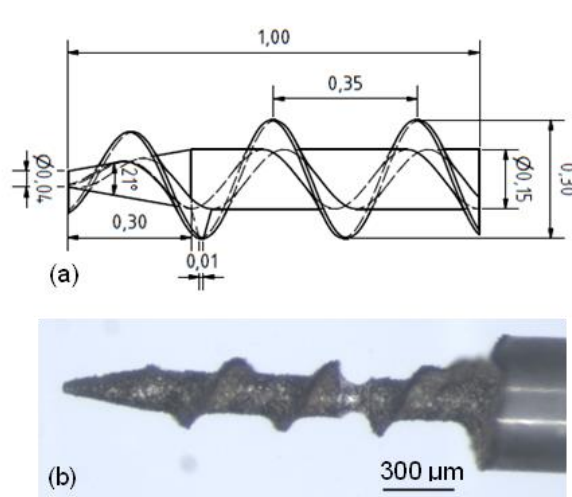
The metal template for the micro-molding process. (a) Schematic drawing of the micro-screw design. Sizes are in mm. (b) Scanning electron microscope image of the micro-screw template manufactured by electro-discharge machining (EDM).
